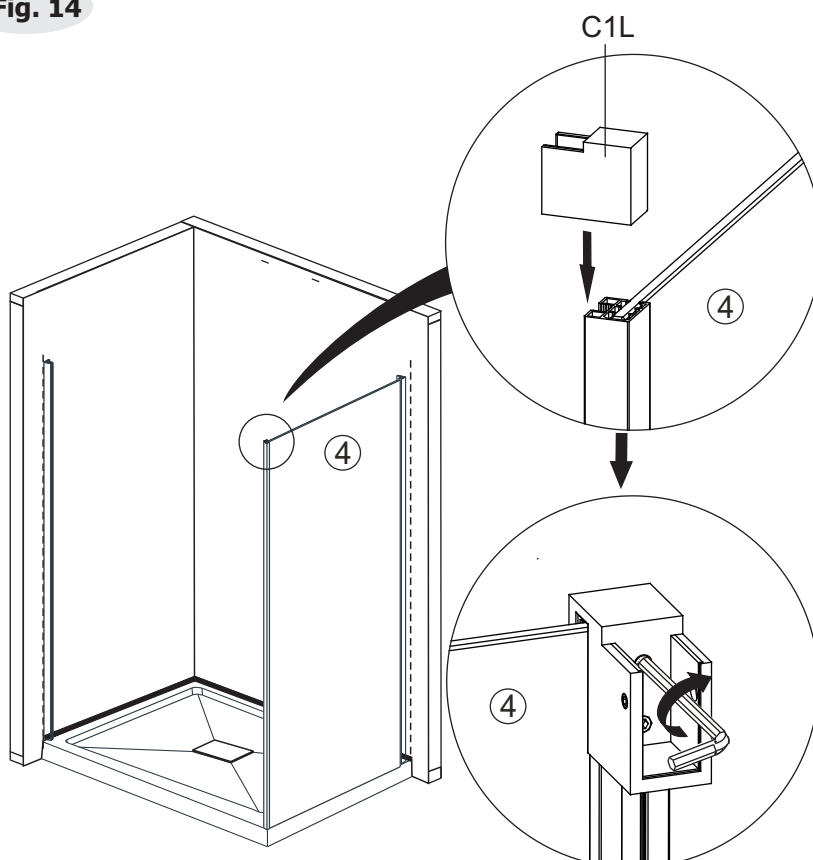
Put the wall fastener (C1L) on the edge of the side panel as shown in the illustration. Fasten the wall fastener on the side panel with Allen key.
